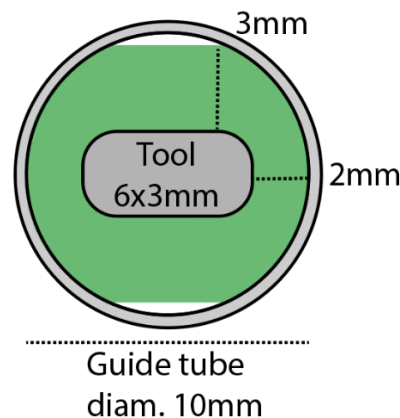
Cross section of tool and guide tube. Based on geometric constraints, the cutting tool can move within the guide tube anywhere in the green area. Relevant distances are marked with dotted lines.
